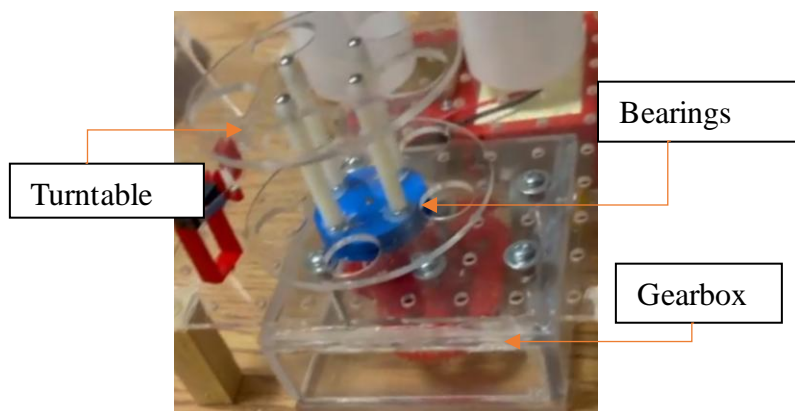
The top view of the built model of the gearbox in the automated fluid dispenser.
